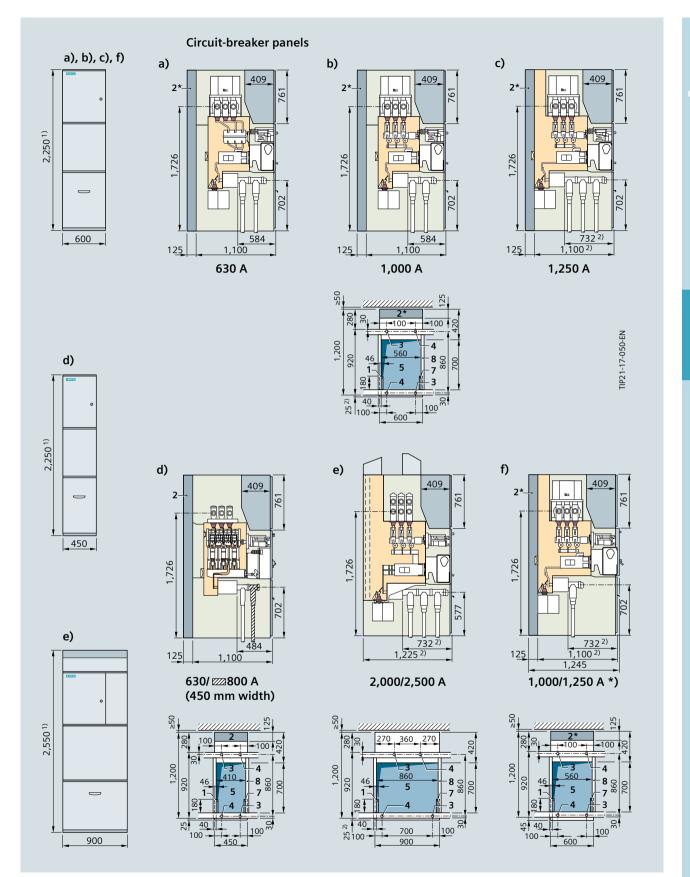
/4: Front and side views as well as mounting surfaces with floor fixing points for circuit-breaker panels with cable connection from below (dimensions in mm; legend and footnotes see Fig. 3/3 on page 54)
